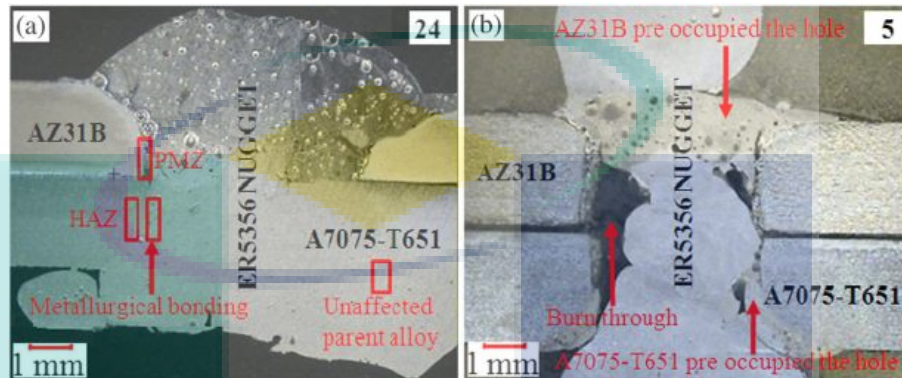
Welding macro cross sections. a) With complete nugget. b) With incomplete nugget
